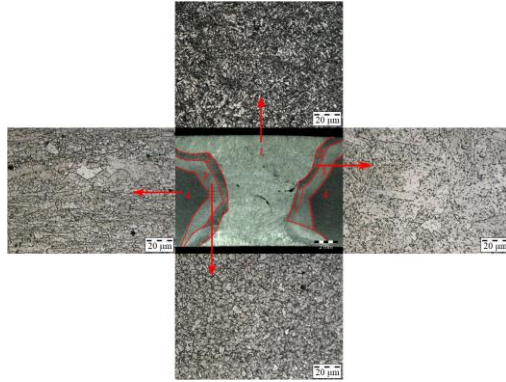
The cross-sectional macro photo and microstructures of Strenx 700MC weld joints, 1) welding pool, 2) grain coarsening zone, 3) grain refinement zone and 4) base metal
